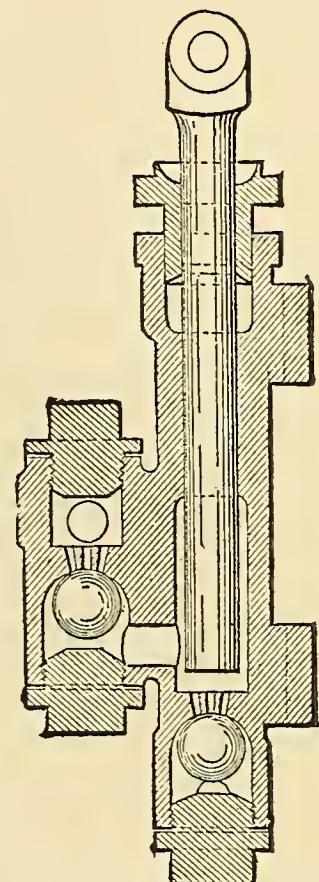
QUICKSILVER PUMP IN SECTION.
